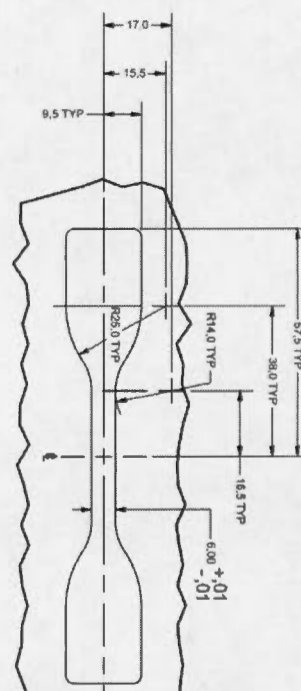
Mold used to prepare the tensile test samples and corresponding dimensions in millimeters.
